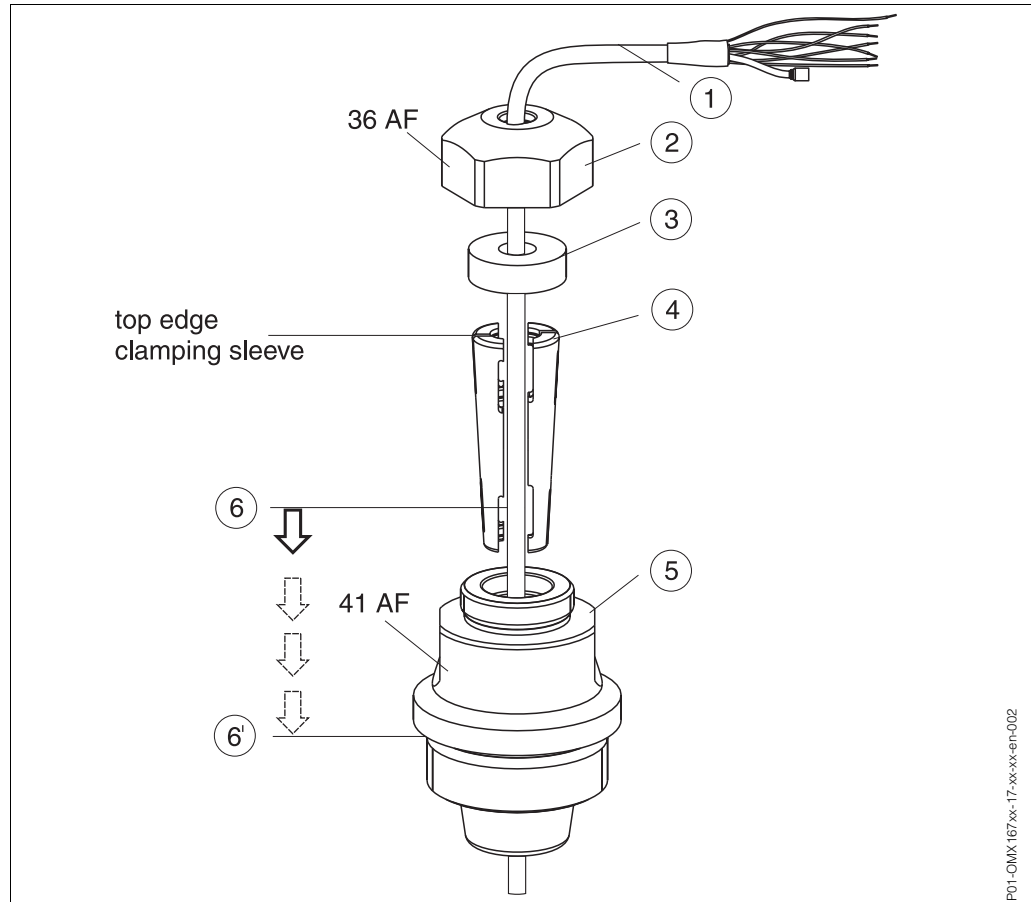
Installing the I-LEVEL OMX 167 with cable mounting screw, here depicted with G 1 1/2 thread
